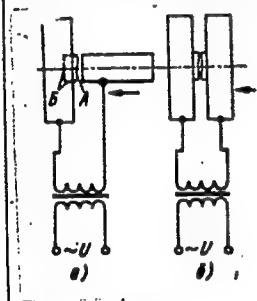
a--dressing a sprue and machining a blind hole with a carbon electrode; b--mutual machining of two sprues.
